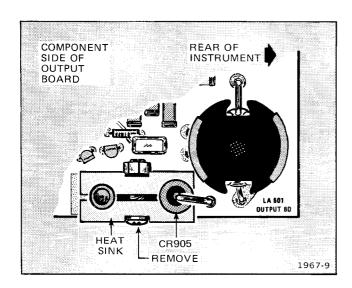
Location of CR905 heat sink on the Output circuit board.
